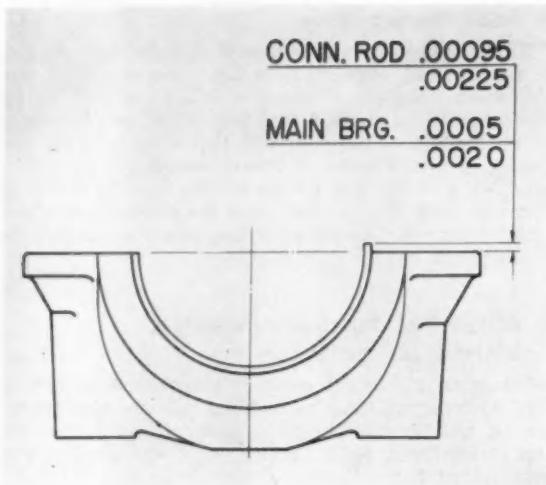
When crushing action of bearing shells during assembly was found to be producing different connecting rod clearances from those desired, redimensioning components corrected error at American Motors.
